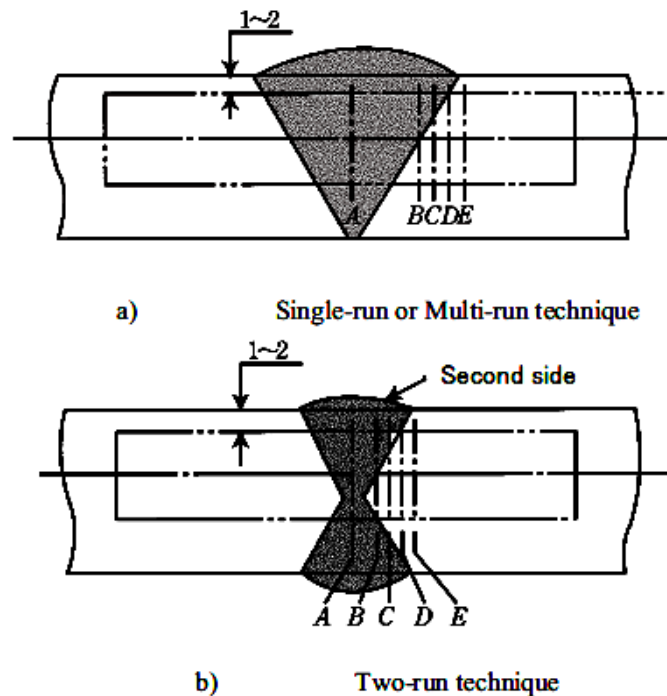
Position of Notch for Impact Test Specimen for rolled steels for hull and quenched and tempered high tensile rolled steel for structure (Where welding heat input is greater than $50kJ/cm$, Unit: mm)
